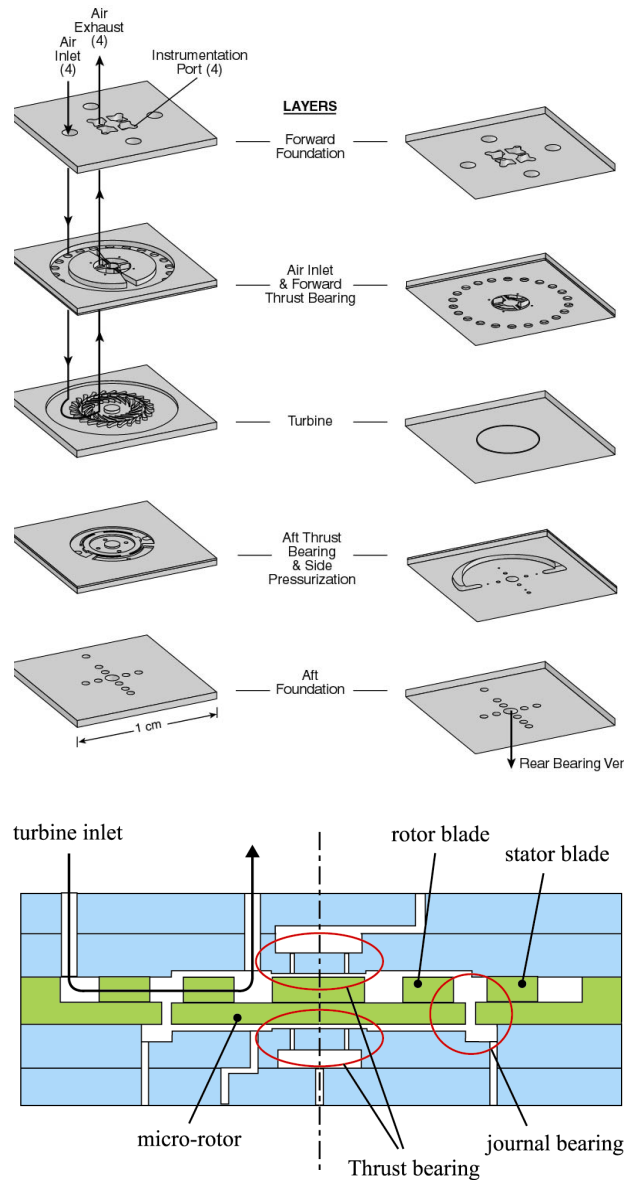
An exploded schematic showing the detailed wafers involved in the microbearing rig. The left column shows the top view, the right column the view from the bottom, and the lower cross section. The design speed of the 4.2 mm diameter rotor is 2.4 million RPM.
